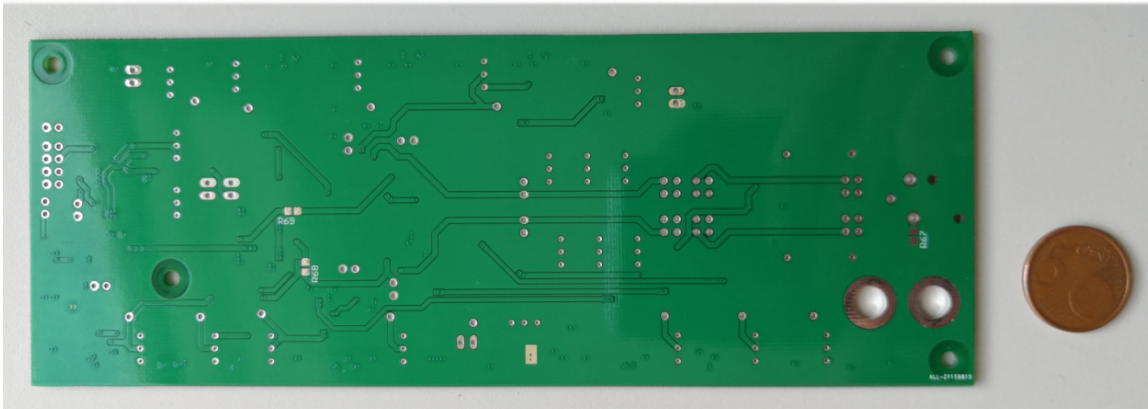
Unpopulated PCB IFC prototype test board, back.
